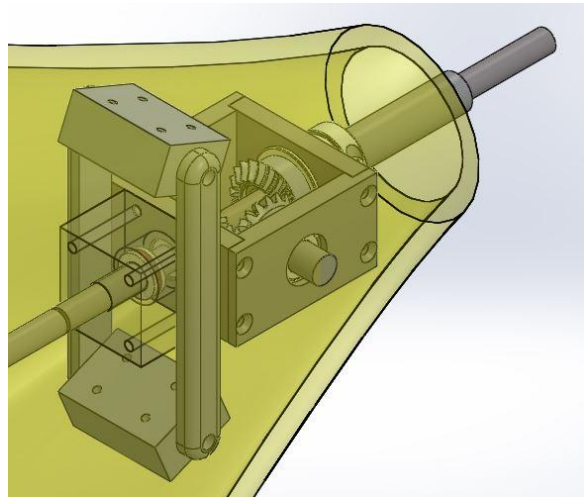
Gearbox brace to transmit thrust to the hull.
